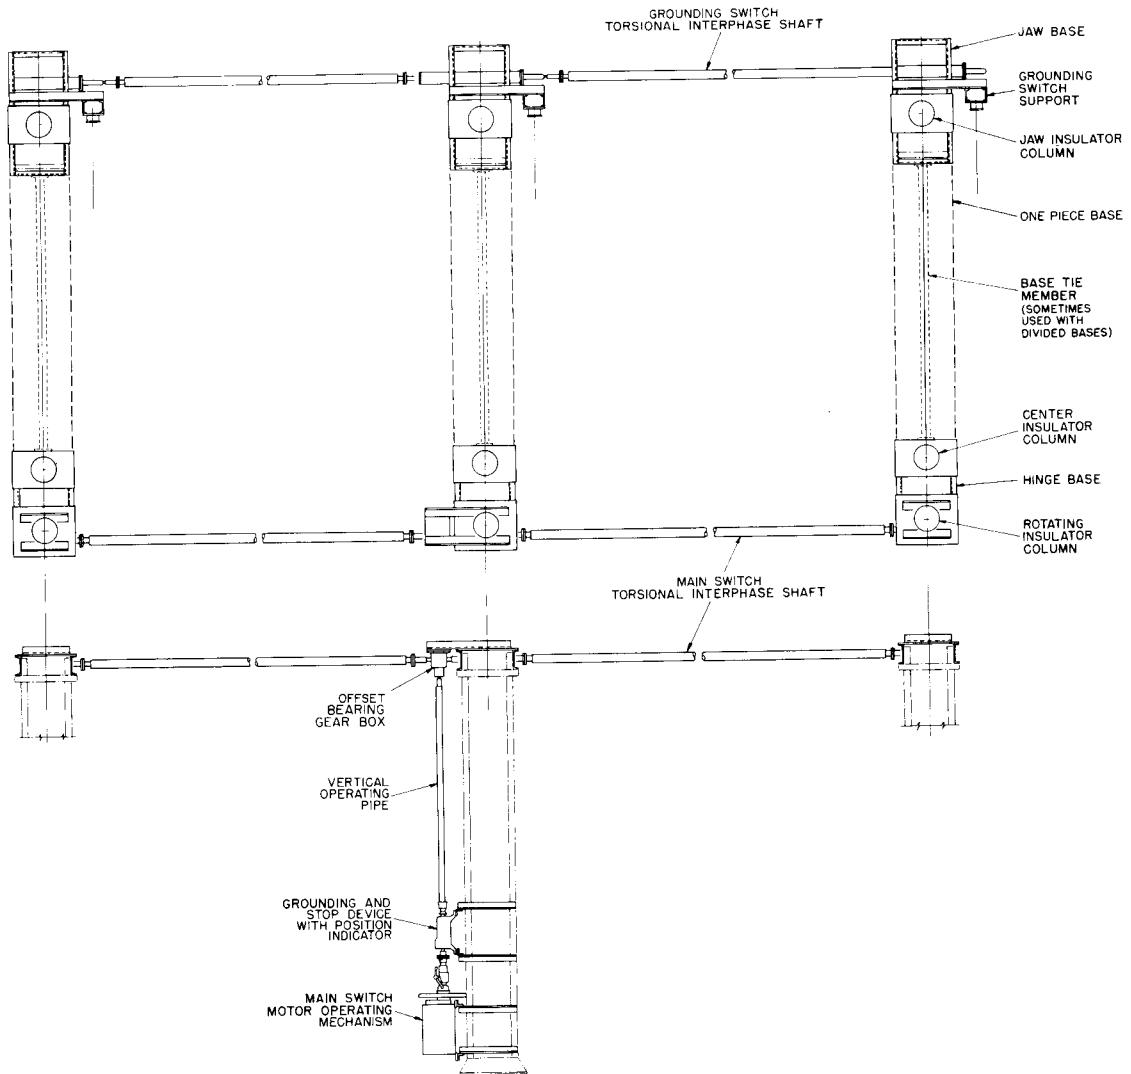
Plan and elevation views of a 3-pole, 500-kV vertical-break switch installation
